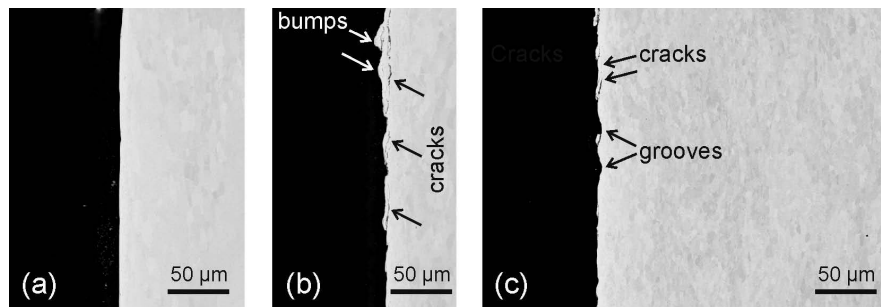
BSE micrographs of the cross section of one flat surface machined by front milling. The surface showed on one hand (a) areas with no particular defect, and on the other hand (b) and (c) areas with cracks, bumps and grooves.
